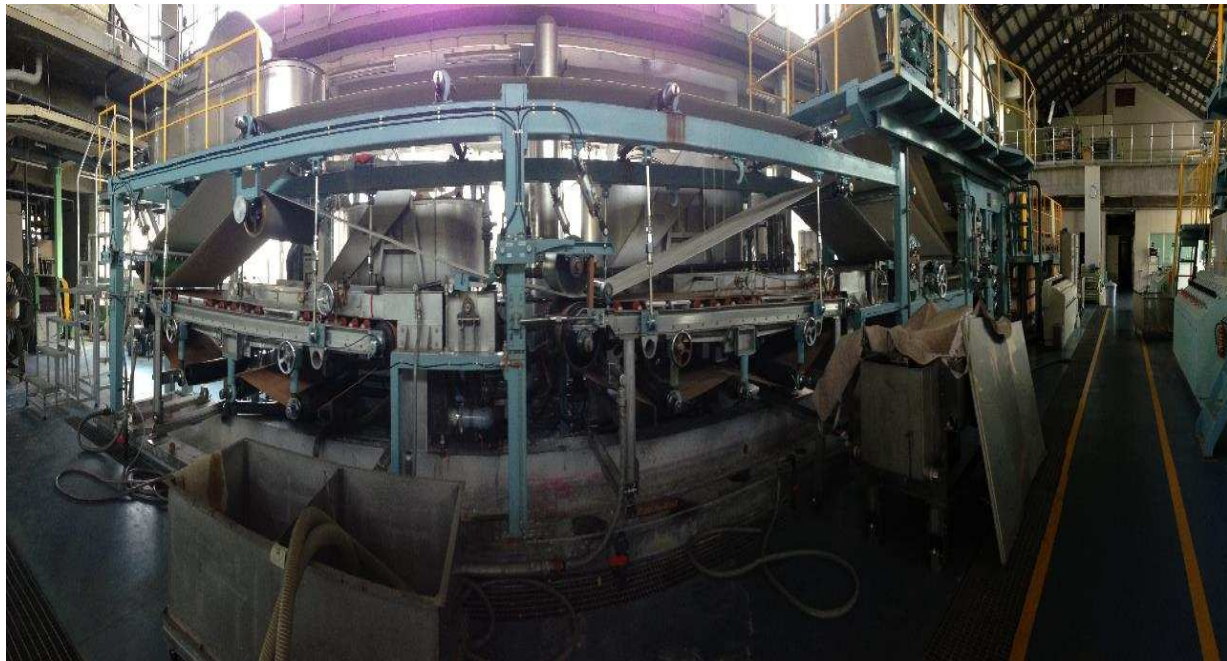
A large Takaokashiki Kensuishiki paper machine capable of producing thousands of sheets per day. Kochi Paper Technology Centre ©
